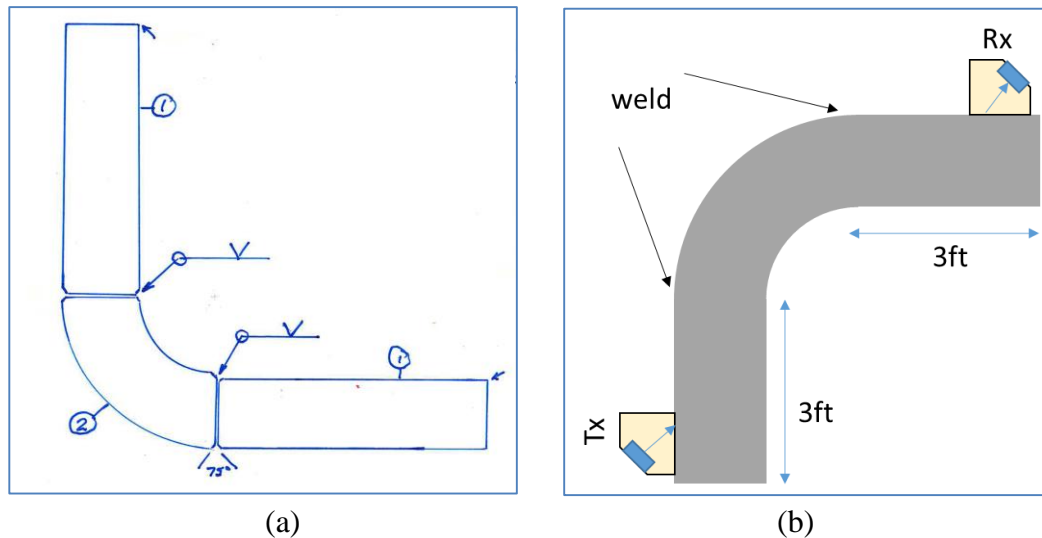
(a) Blueprint drawings of straight sections and elbow (b) Schematics of welding piping assembly
